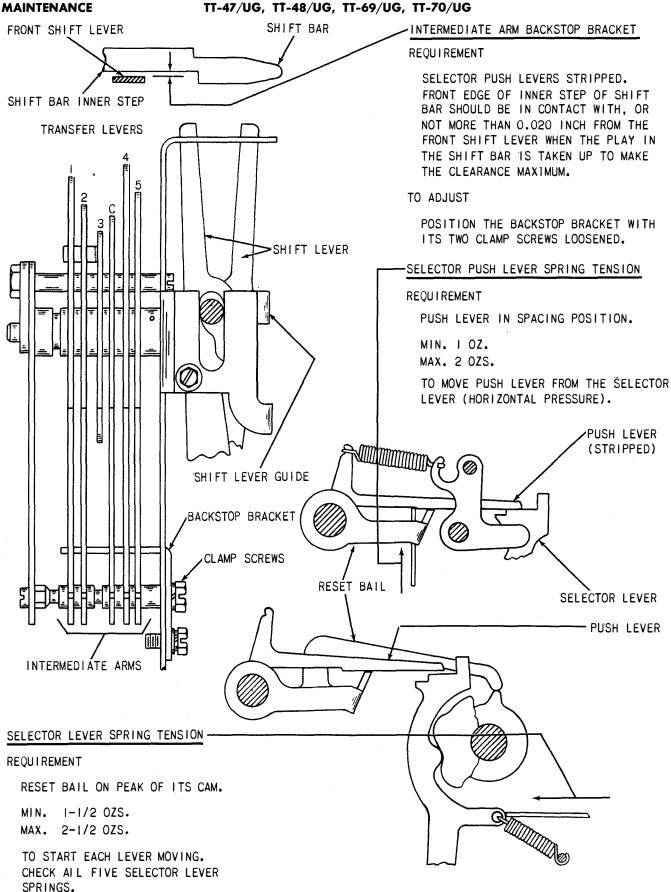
Automatic Typer, Code Bar Shift Mechanism
